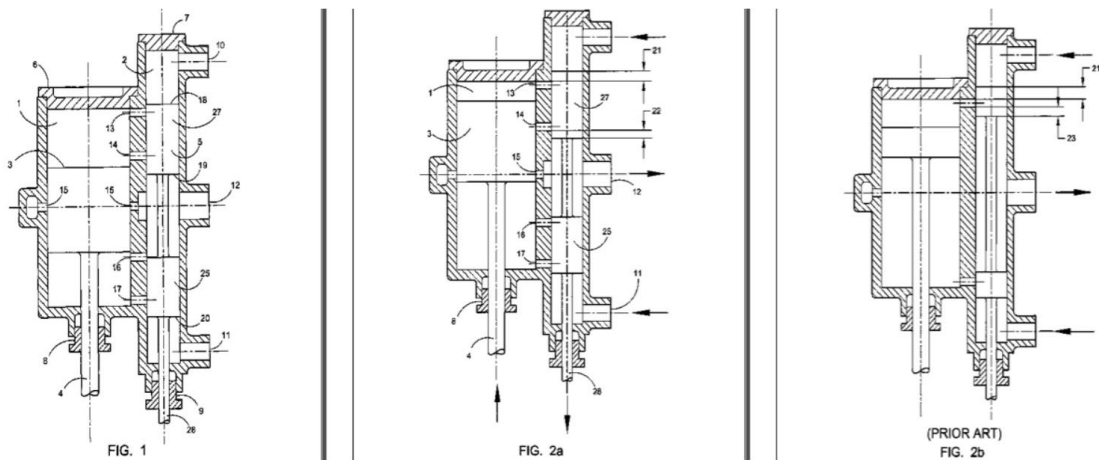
Sectional view of the device featuring a cylinder arrangement for a Uniflow, double-acting type steam engine.
